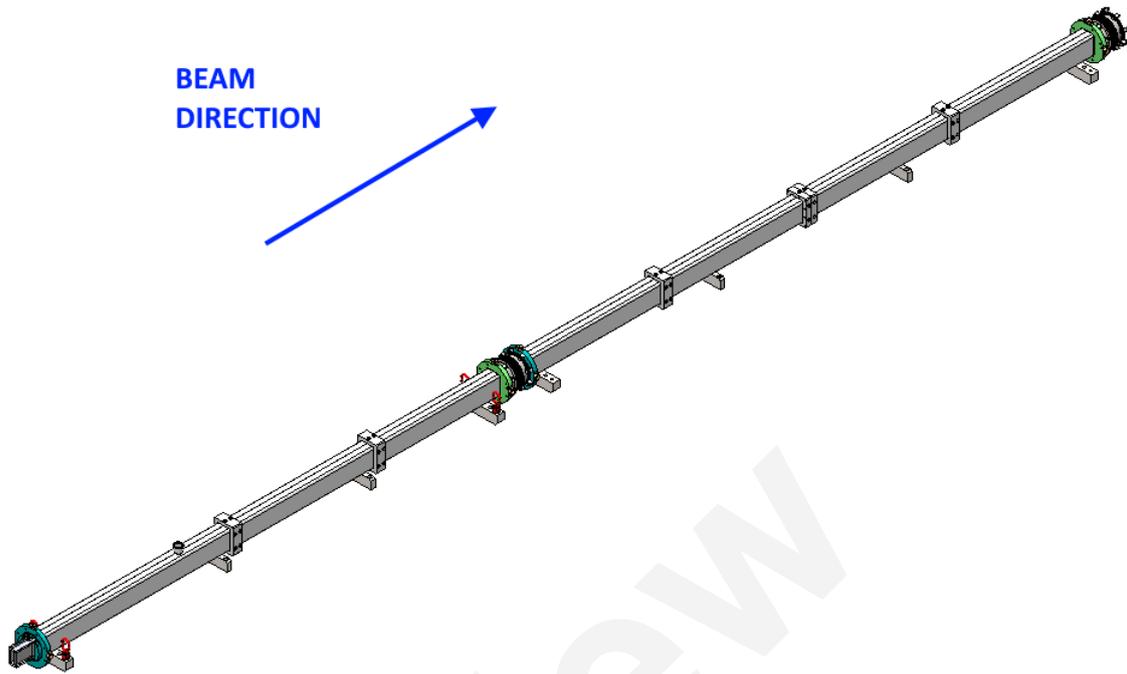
Assembly of the vacuum housing for W02-15 section of the neutron guide.
